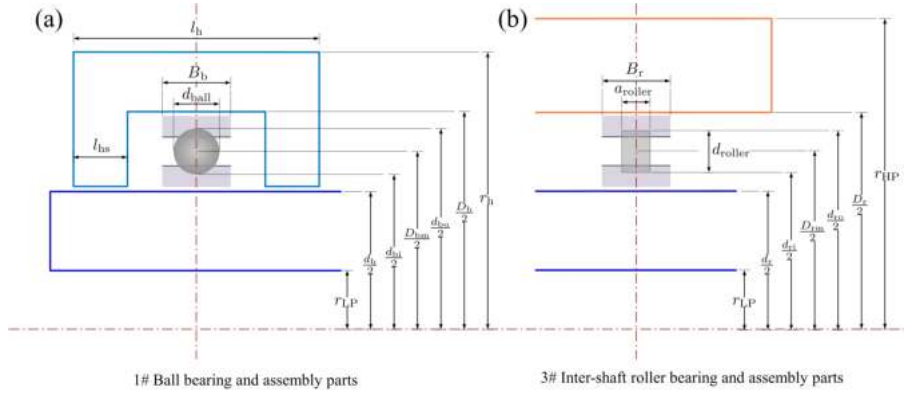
Structure parameters of the bearing and assembly parts (a) for the 1# ball bearing. (b) for the 3# inter-shaft roller bearing.
